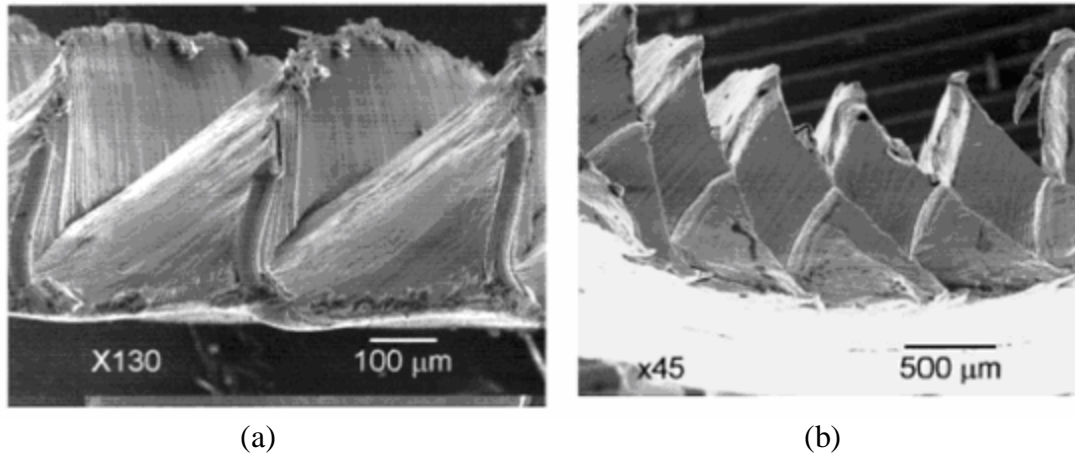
Serrated chips obtained in machining a Ti 6Al-4V alloy at cutting speeds (a) 80 m/min and (b) 140 m/min [33]
